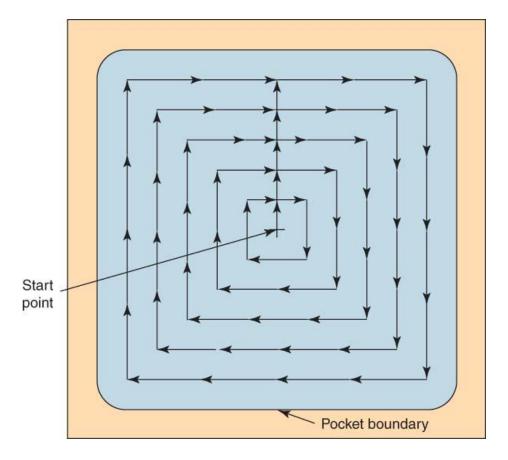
Rough machining of a pocket should be performed with a larger-diameter endmill than the finishing operation so sufficient material is left in the corners to be machined by the smaller radius of the finishing tool. © Cengage Learning 2012
